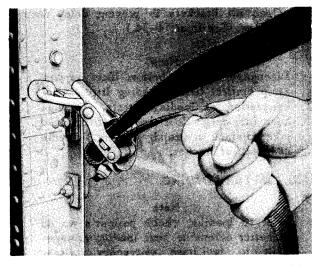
Adjusting Retaining Cap Assembly for Proper Length
